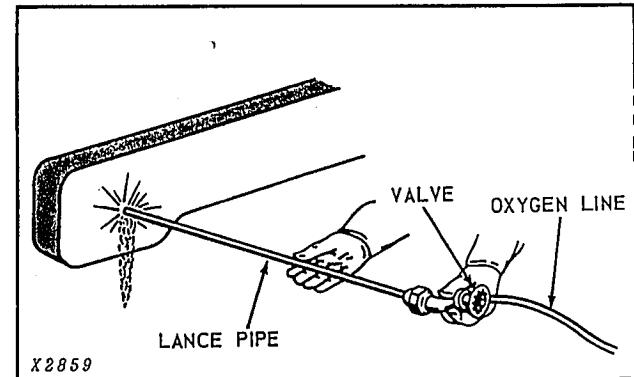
Lancing Is Used To Cut Deep Holes In Thick Metal Sections
